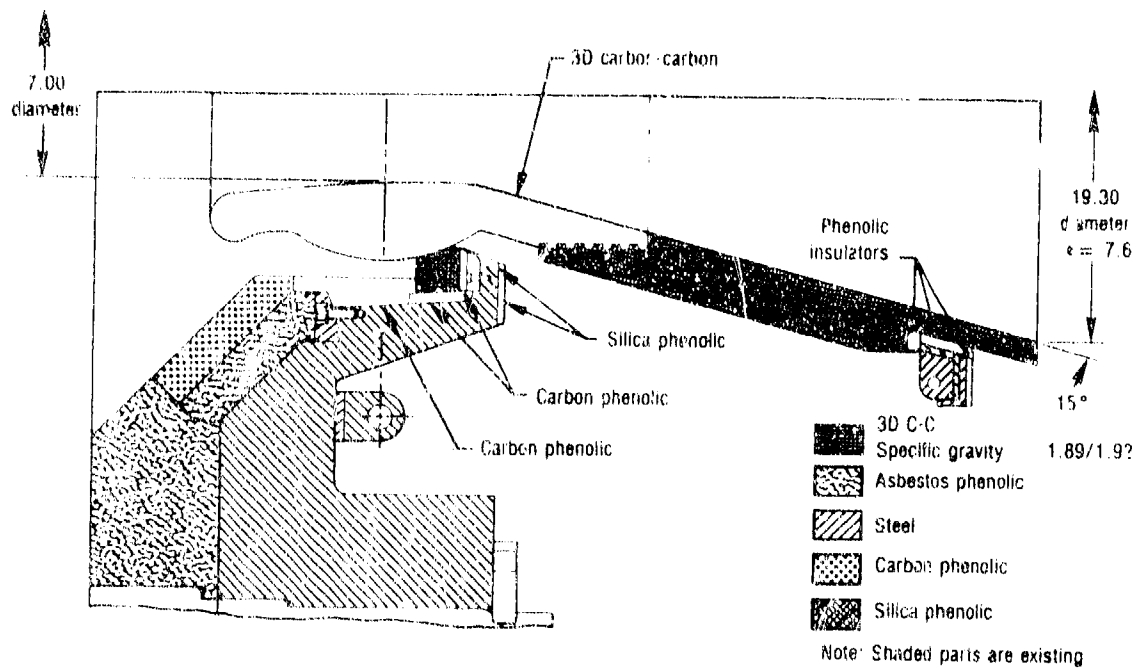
Suggested Redesign, Hot Ball and Socket Nozzle S/N 3
